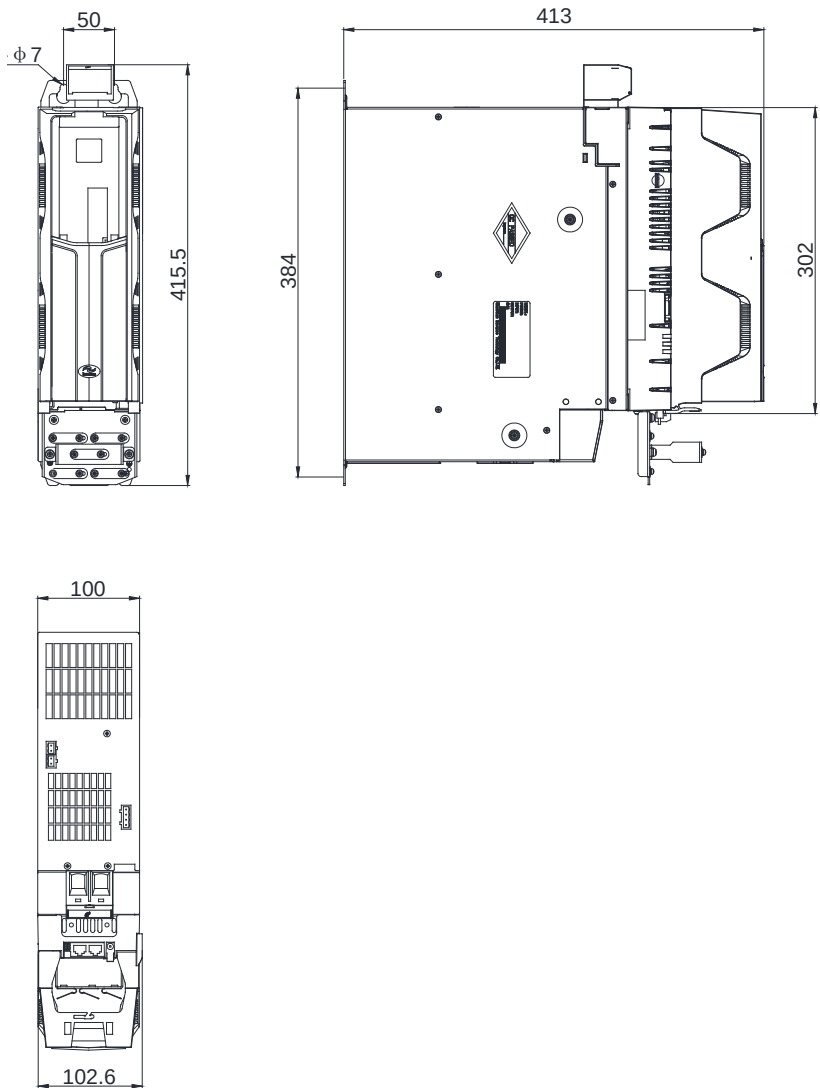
Dimensions of Size H1...H3 Inverter (mm)
